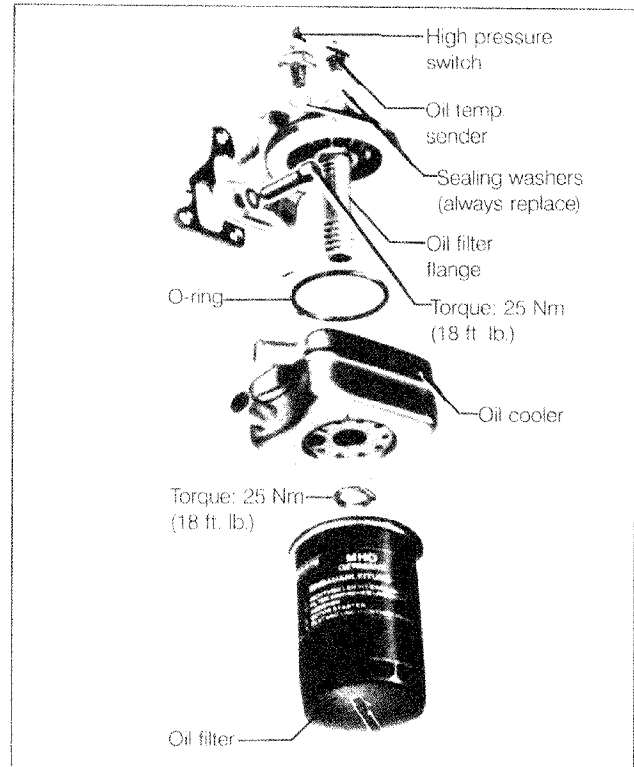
Exploded view of oil cooler and related parts. 8-valve engine components shown. Specifications also apply to similar parts for 16-valve engines.
